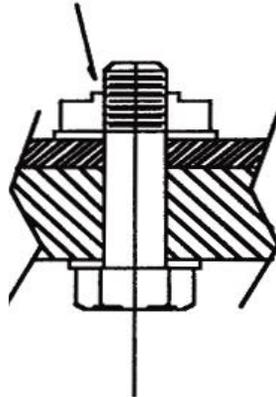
Grip Length Requirements for Bolts in Bearing
